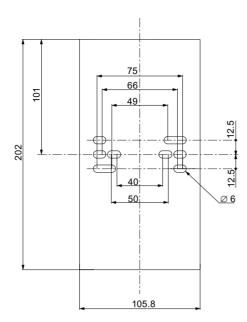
Hole drilling template: Fuse switch disconnector size 00
